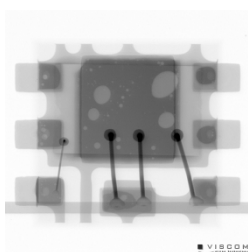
DFN2020MD-6 (SOT1220) – Component D187 with tin-plated wettable side pads
